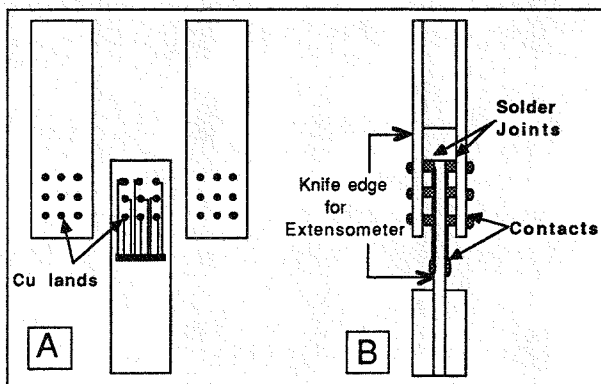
Schematic illustration of double shear specimen. A) Before and B) After assembly.
